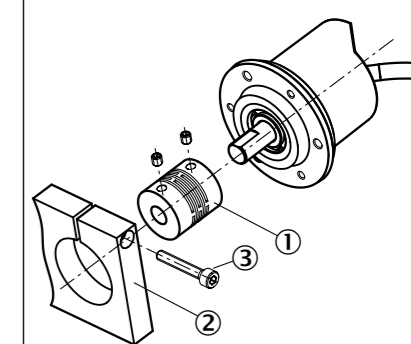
Installation DBS50 Face mount flange with servo-clamps
